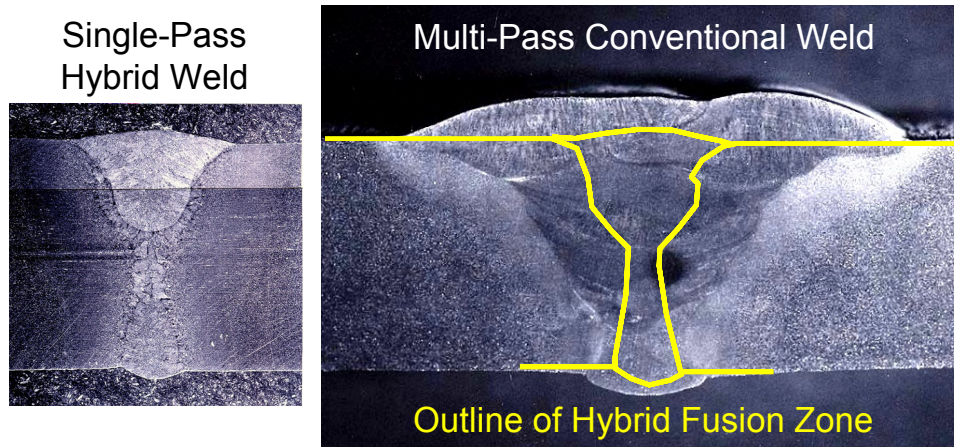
Macrosections comparing fusion zone of single-pass hybrid weld of 0.5 inch thick plate to a multipass conventional weld.
